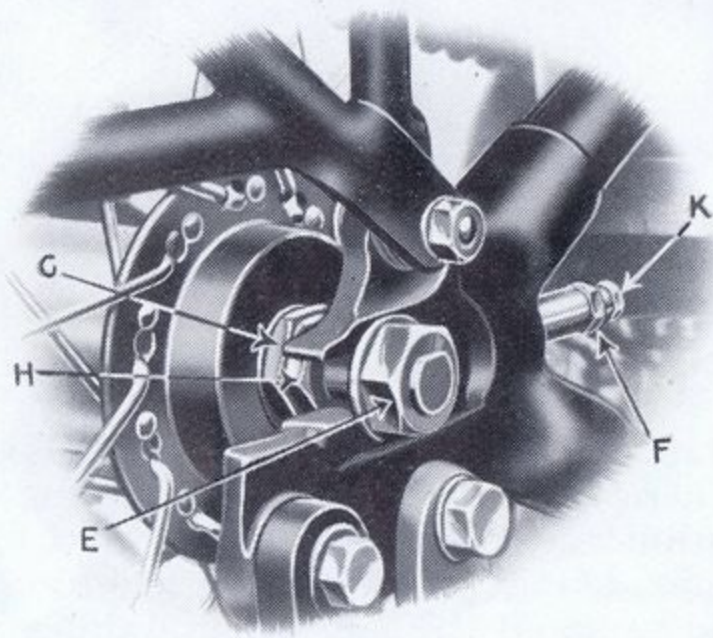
REAR WHEEL AND BEARING ADJUSTMENT.
